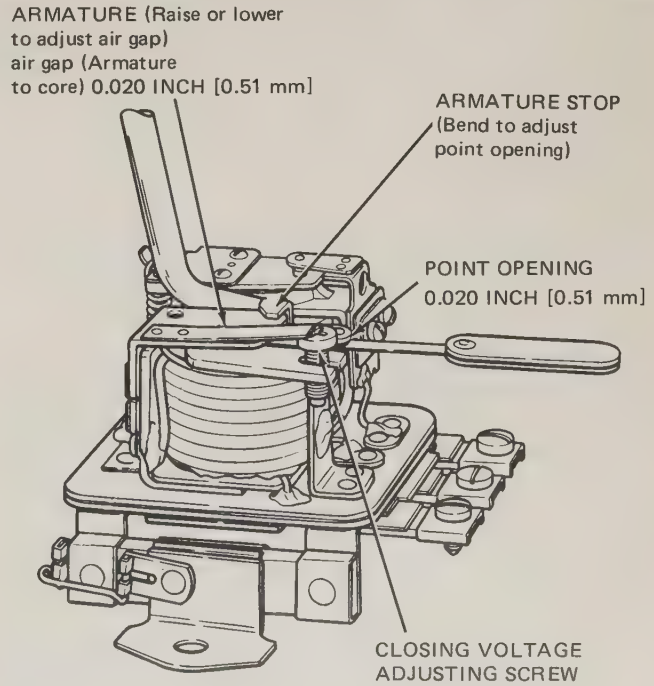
Cutout-relay adjustments. (Kohler Company)
